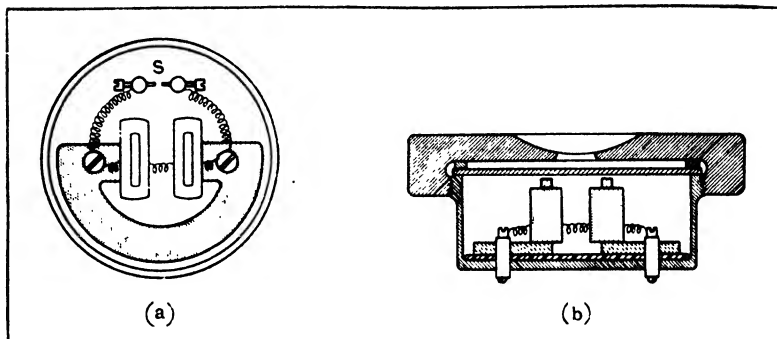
Watch Type Telephone (a) Plan; (b) Section
